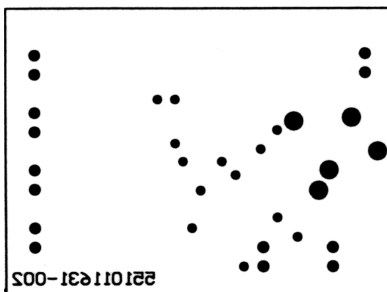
Recommended MM PC Board Layout: Bottom_Side Layout
